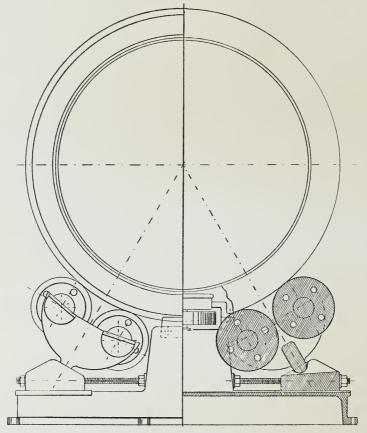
Kiln Bearings (portion of Ring cut away to show Cheek Roll).
